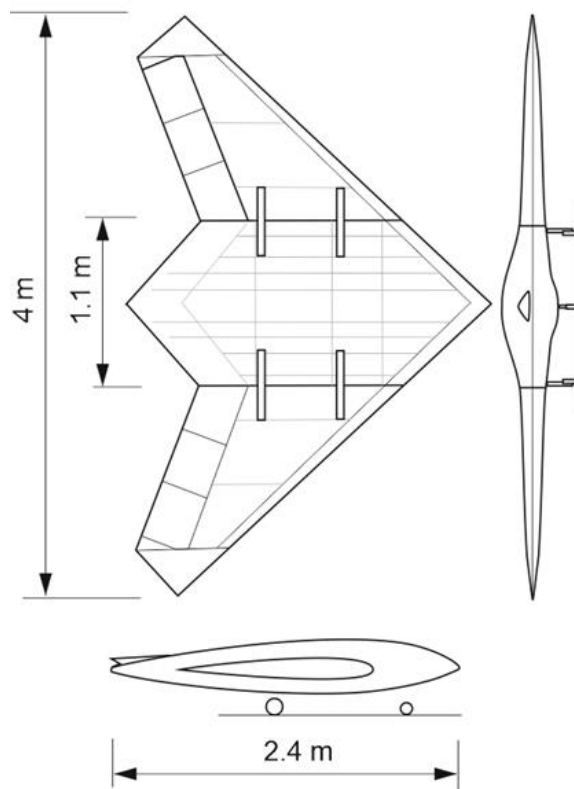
MAGMA 3 View Drawing and Key Dimensions, Fins Off.
